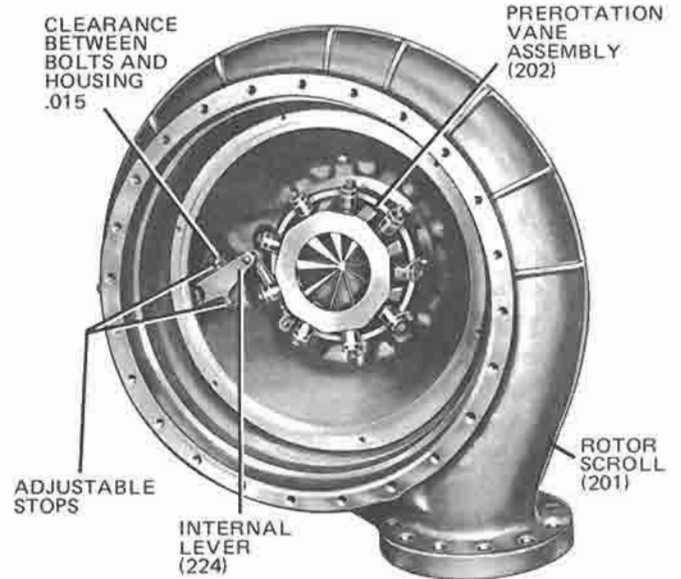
ROTOR SCROLL SHOWING PRV ASSEMBLY
